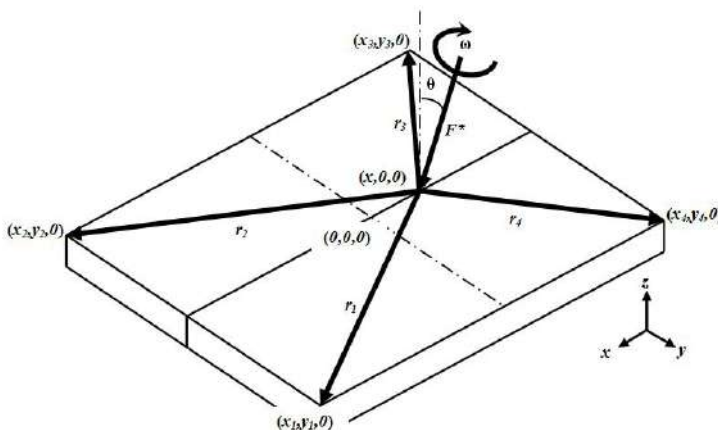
Co-planar analysis of the workpiece material during welding process [65].
